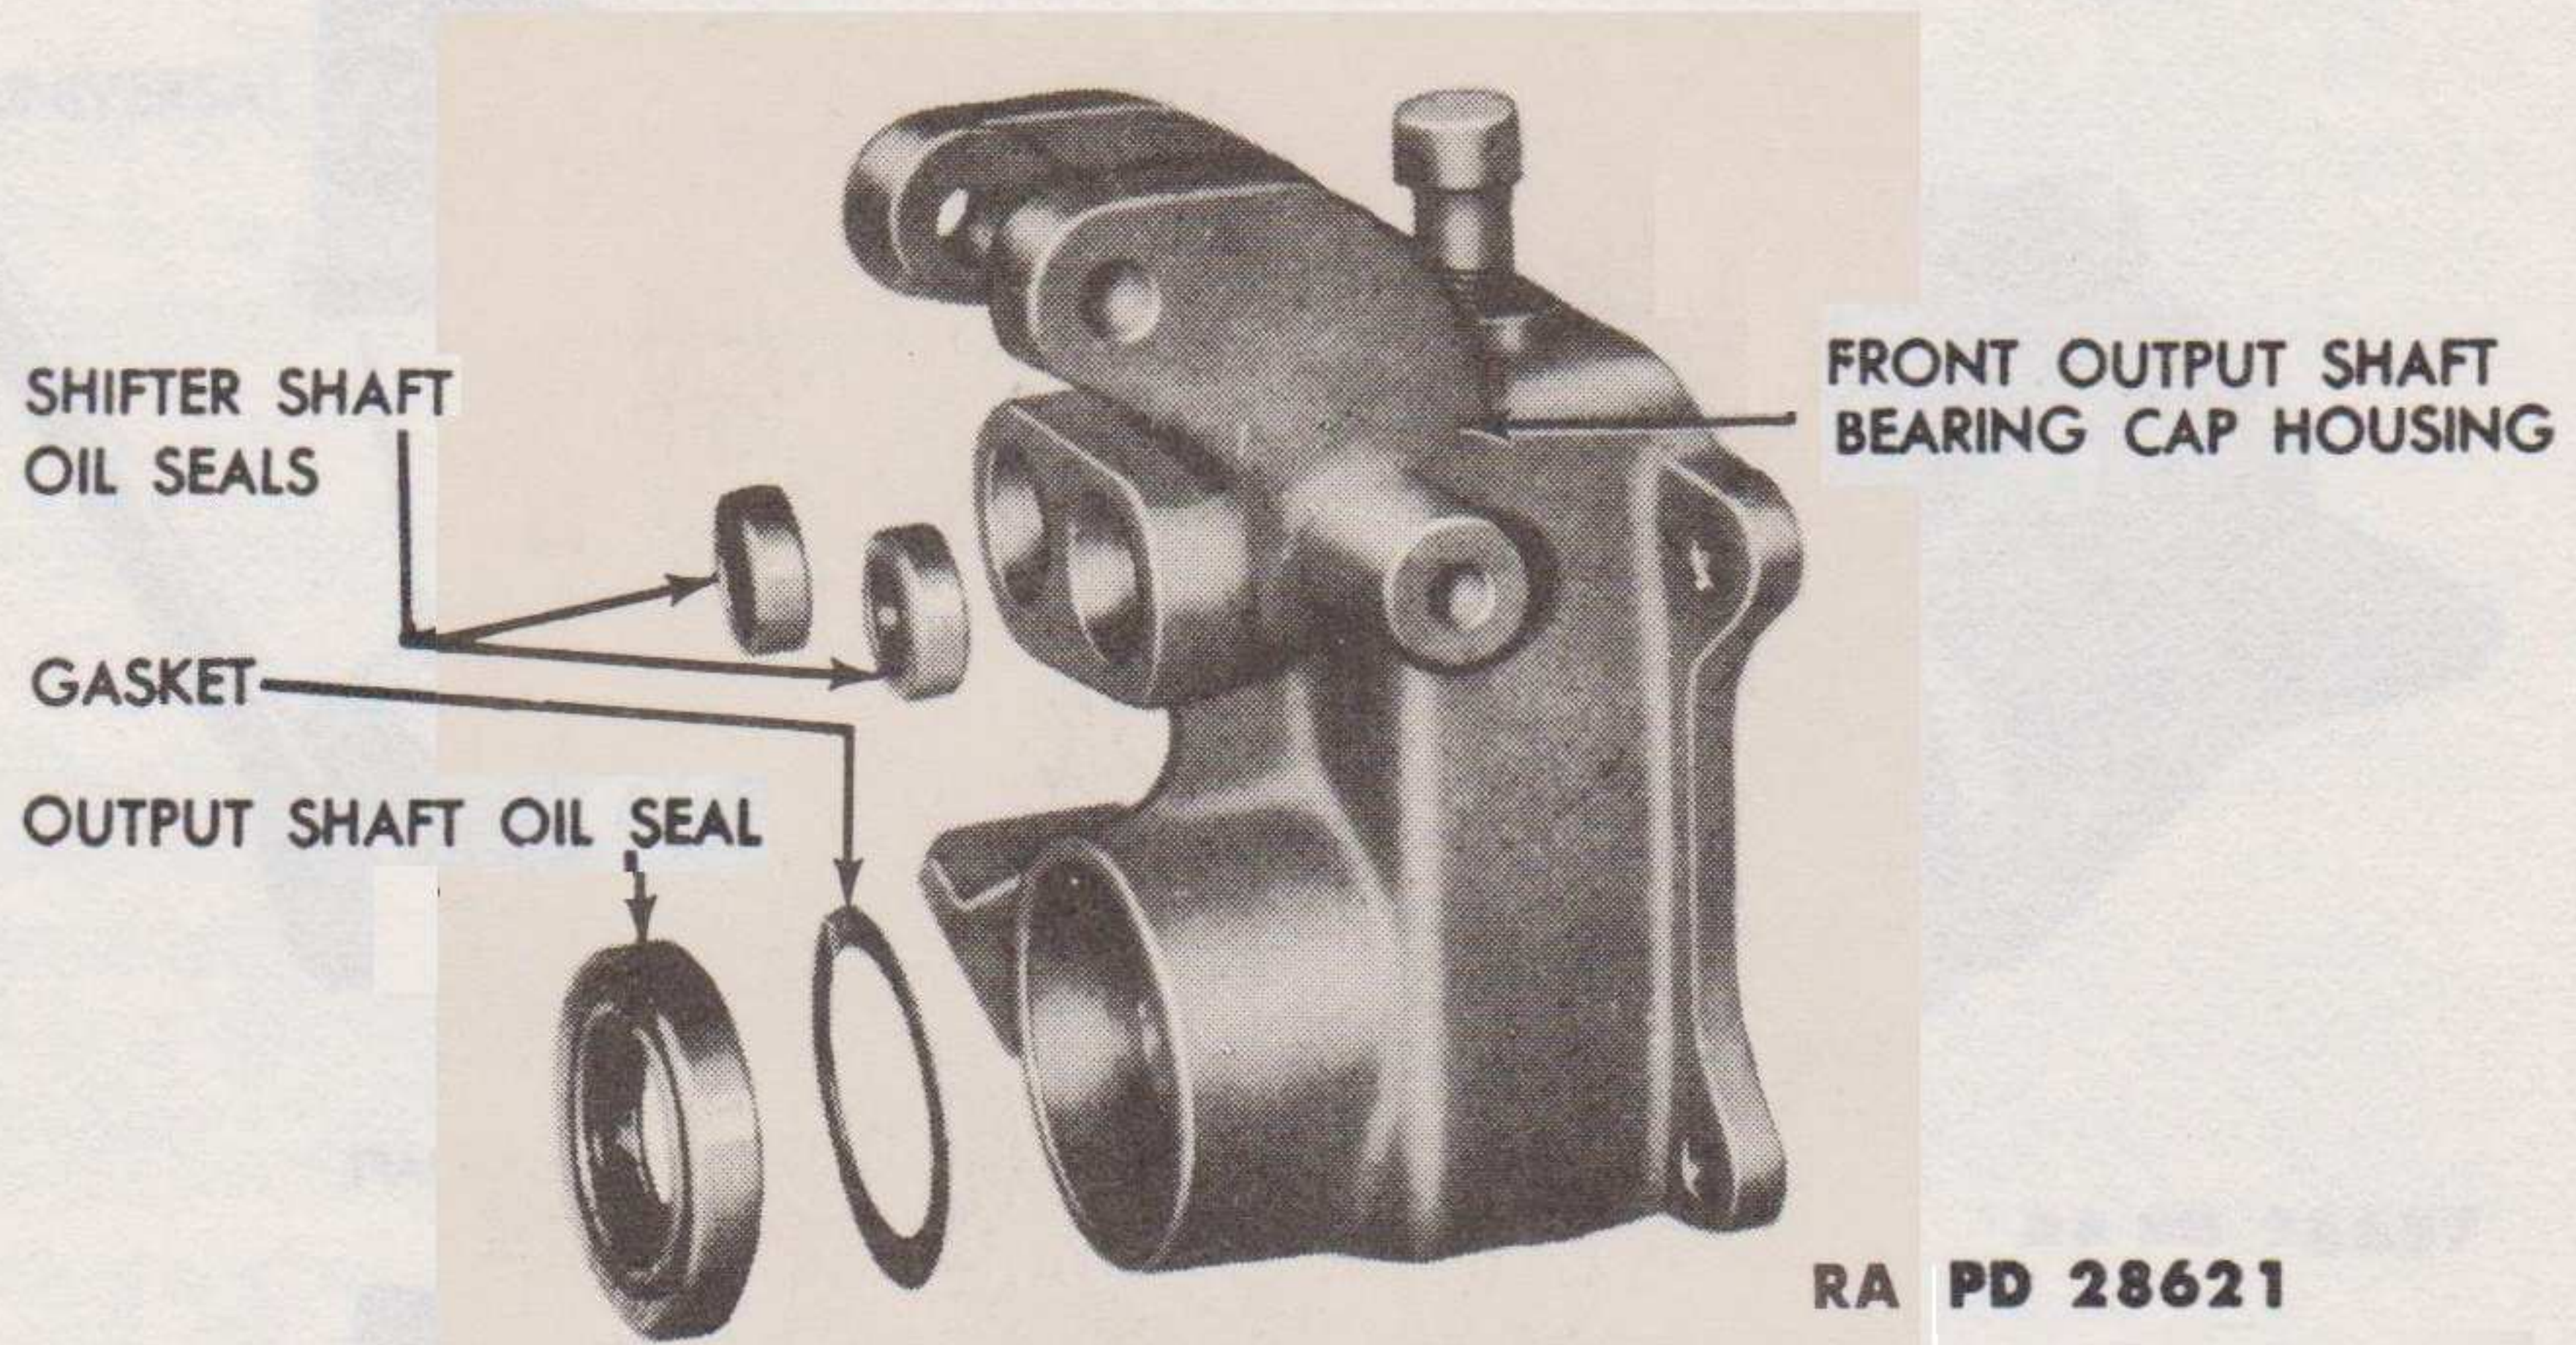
Front Output Shaft Bearing Cap Housing and Oil Seals
